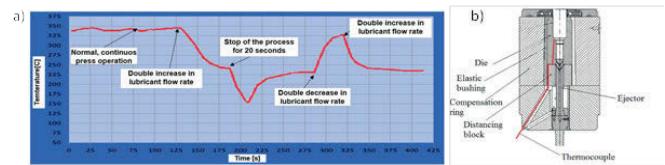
A view of: a) die temperature course during forging with the marked most frequently occurring process disturbances, b) scheme of the thermocouple assembled in the tool [8]
